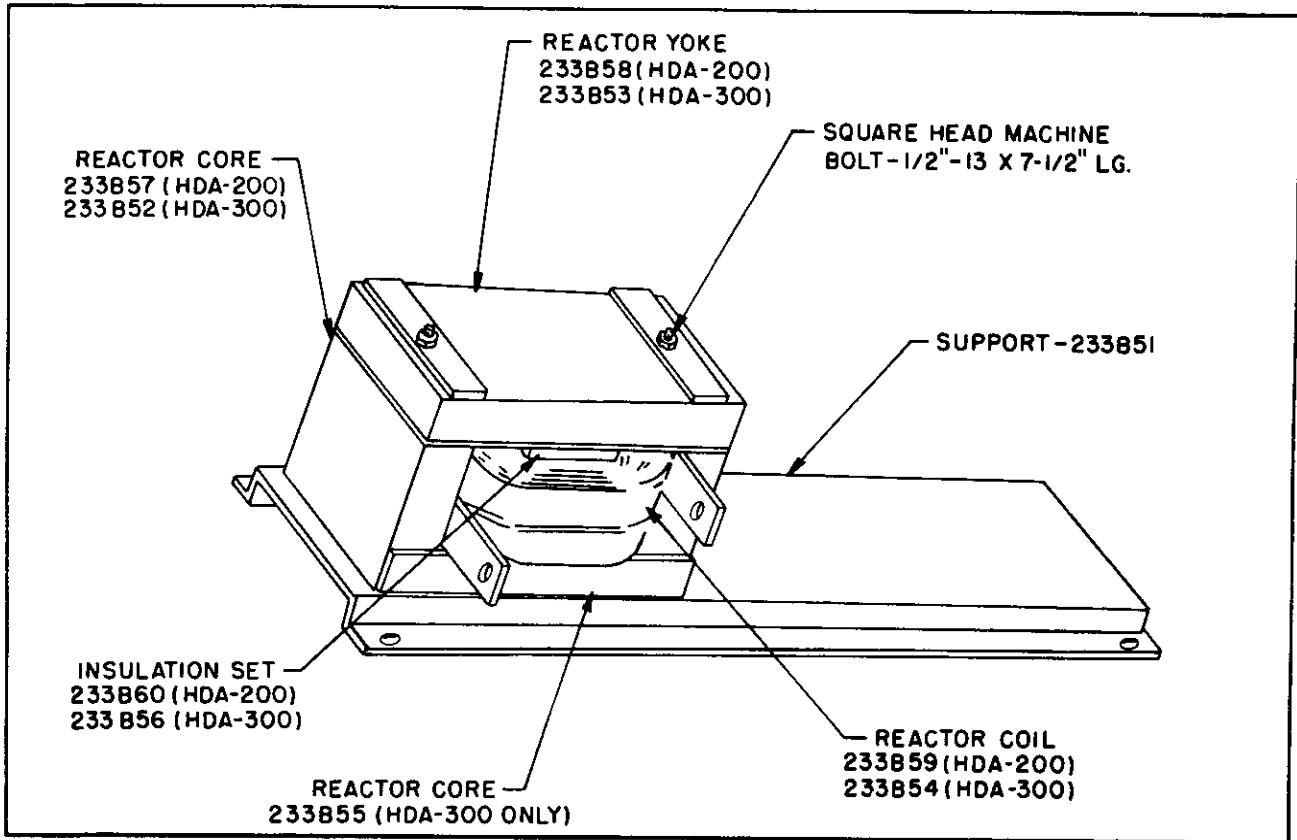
Auxiliary Reactor Assembly, Part No. 232B76 (HDA-200)
